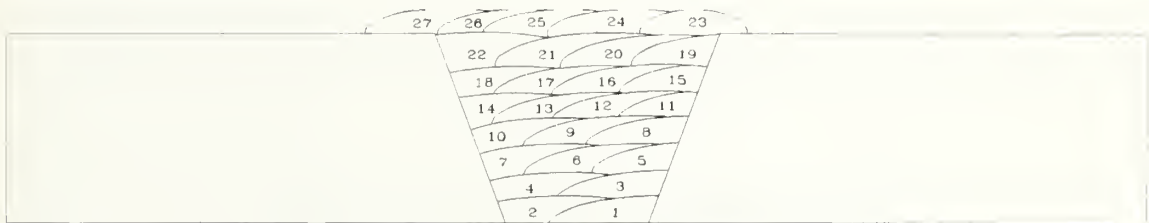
HY-100 Overmatched Specimen Weld Bead Arrangement
